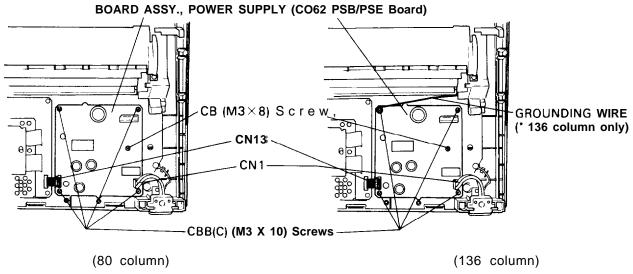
Removing the BOARD ASSY., POWER SUPPLY
